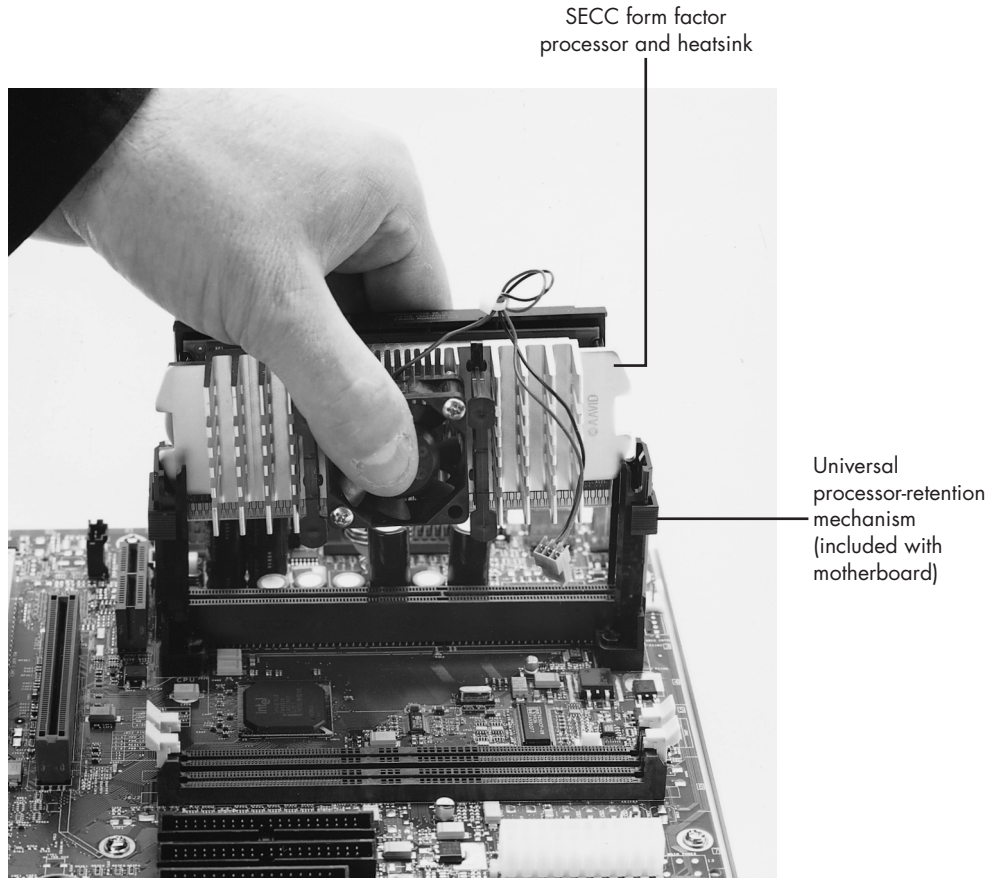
Installing a slot-based (single edge contact cartridge or SECC) processor and attaching the heatsink fan power connector. *Motherboard and processor courtesy of Intel Corporation.
